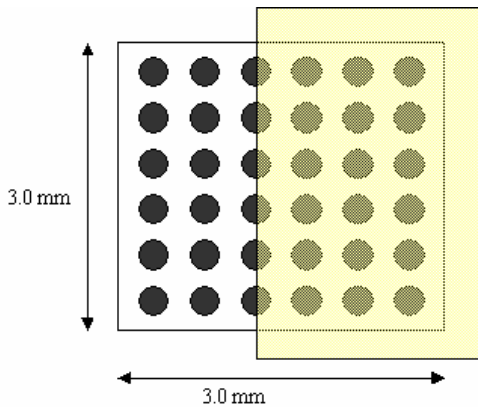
Layout of the 36 I/O Micro-SMD bump pattern.
